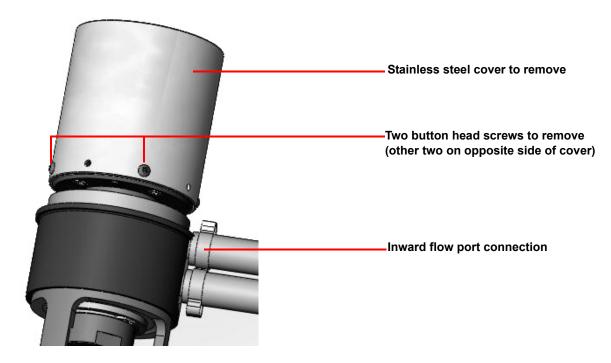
Sealed Fluid Bath cover and button head screw locations.
